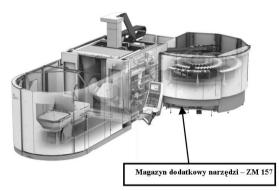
Example machine Hermle C30 magazine holding UP at 157 additional tools [6]
